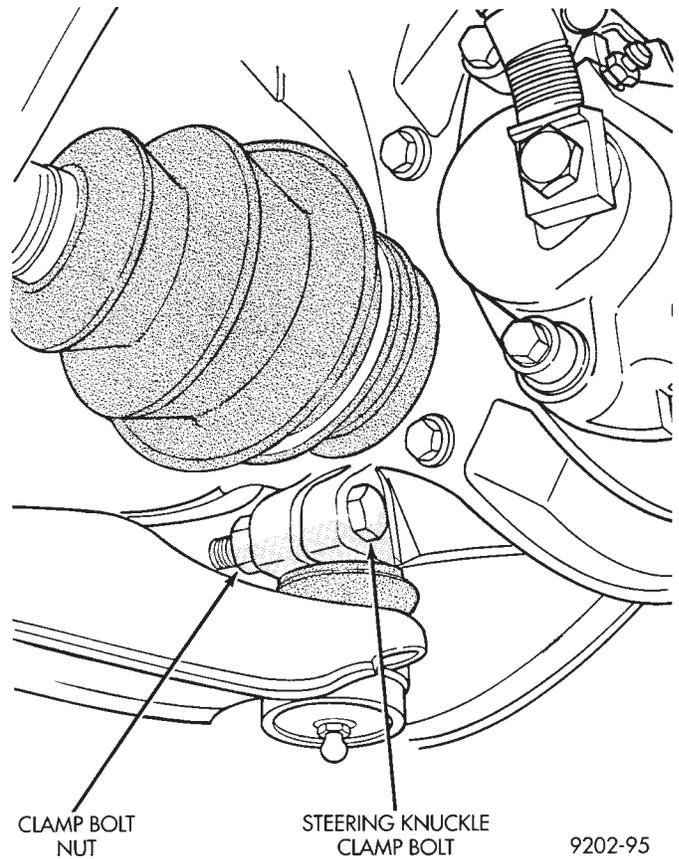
Remove or Install Steering Knuckle Clamp Bolt
